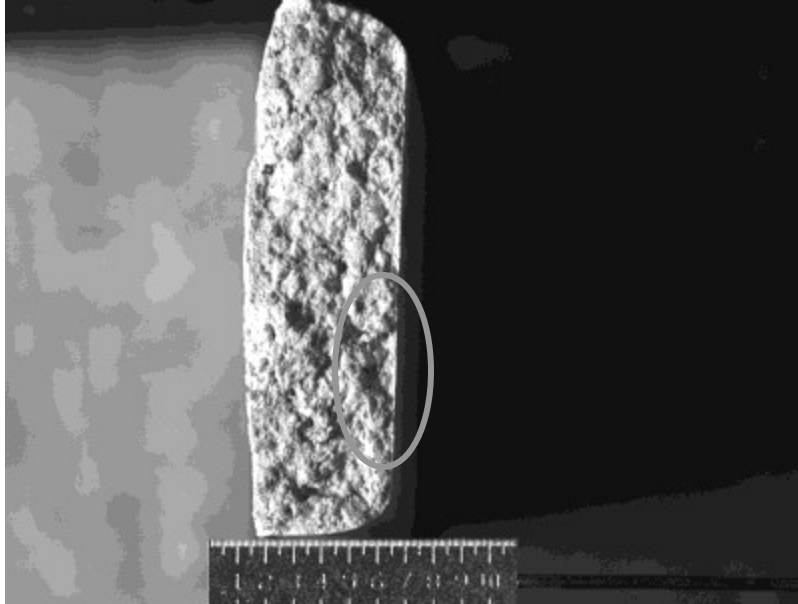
Fractography of Broken Bar, Oval Indicating the Critical Flaw
